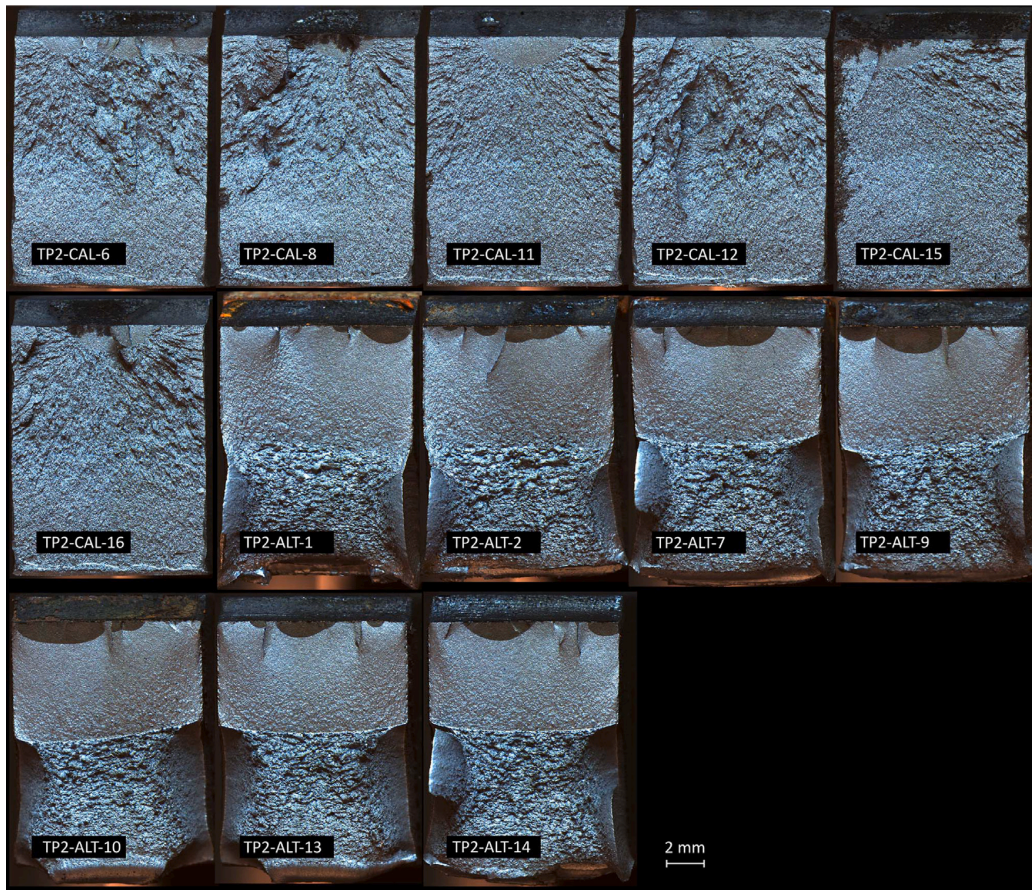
Macrographs of fracture surfaces of specimens from TP1. Codes on the figure refer to the specimen IDs stated in Table B.3. The CAL specimens were submerged in liquid nitrogen and cracked open after fatiguing to different crack depths. The ALT specimens were cracked open in ambient temperature after fatiguing until 20 Hz load frequency drop. Fracture surfaces of some CAL specimens were damaged by corrosion in air during storage. Specimens TP2-ALT-1 and TP2-ALT-2 were fatigued until unstable fracture at load frequency drops between 20 and 25 Hz, instead of terminating the fatiguing at 20 Hz drop. However, the cycle count at 20 Hz drop was used for lifetime evaluations.
